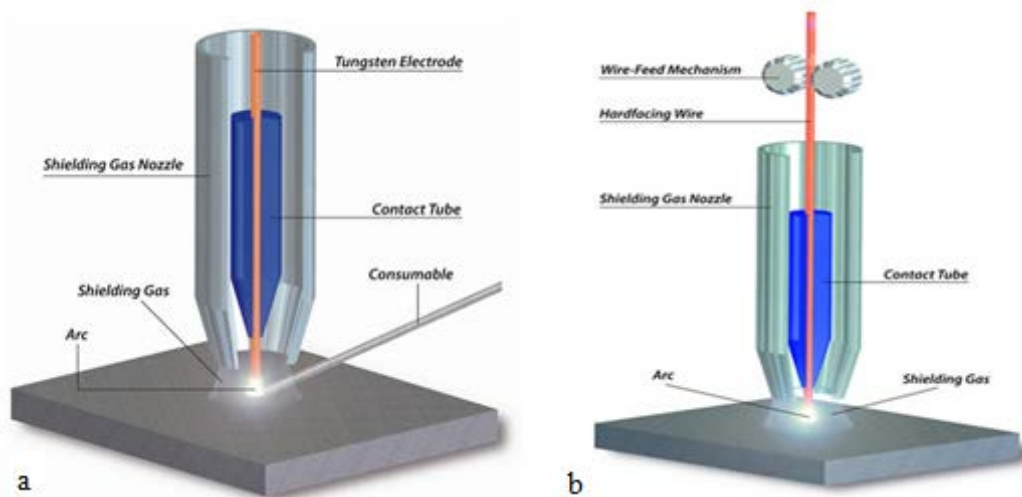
Schematic illustrations of (a) gas tungsten arc welding [120], and (b) gas metal arc welding [121] processes.
